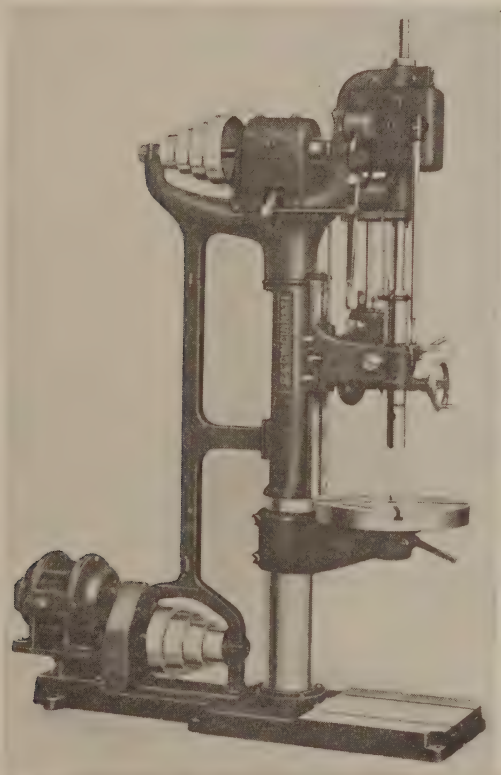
Standard upright drilling machine with spindle-reversing mechanism.
